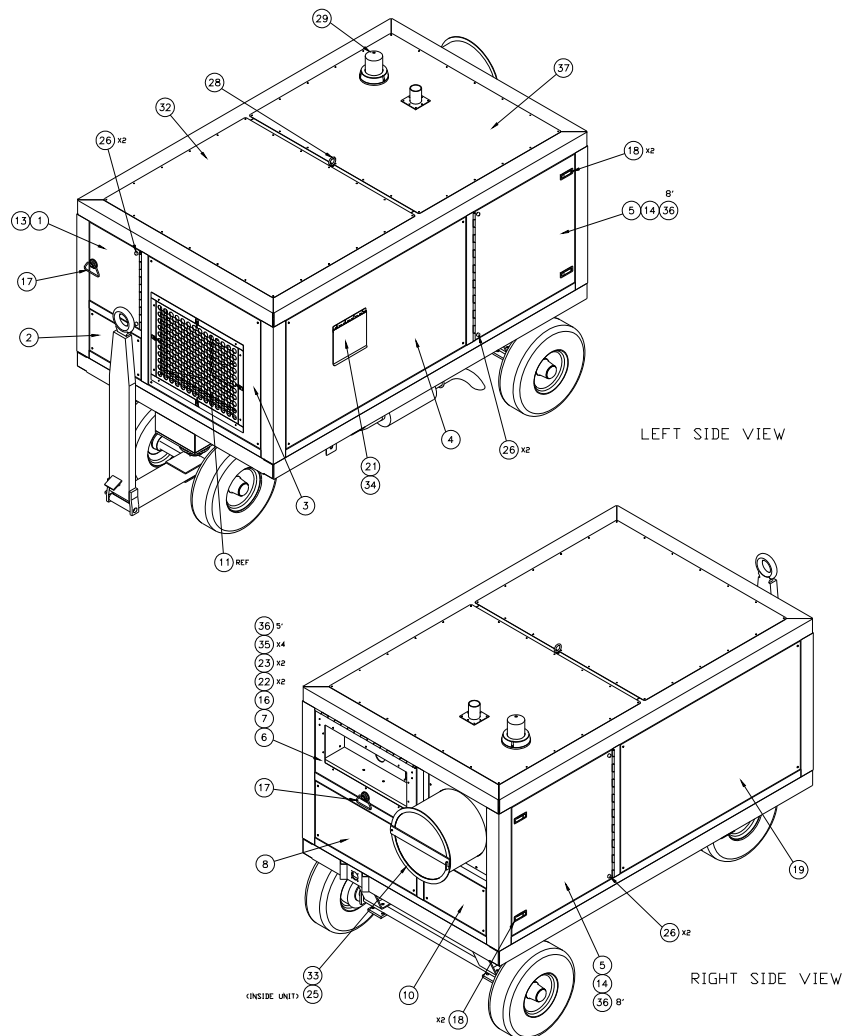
5050D Doors and Panels. Ref. Section 4-3.
